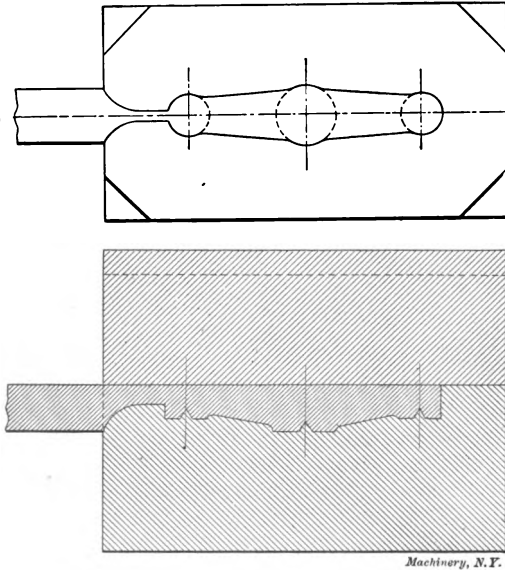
Example of Forging Die Forming Center Holes in the Bosses of the Work
